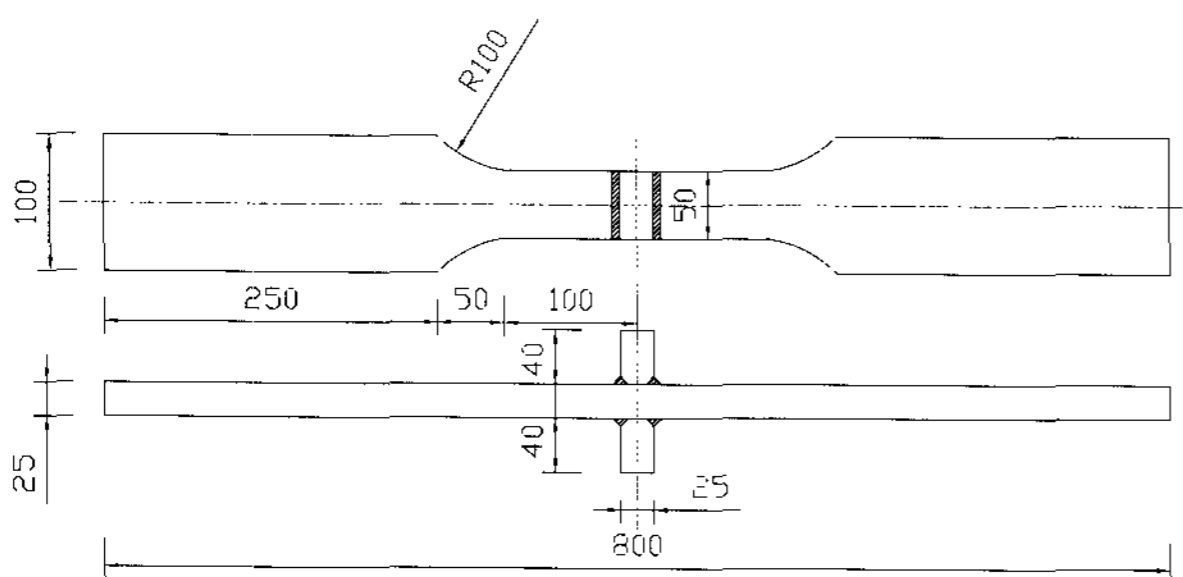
Non-load-carrying fillet welded cruciform joint
